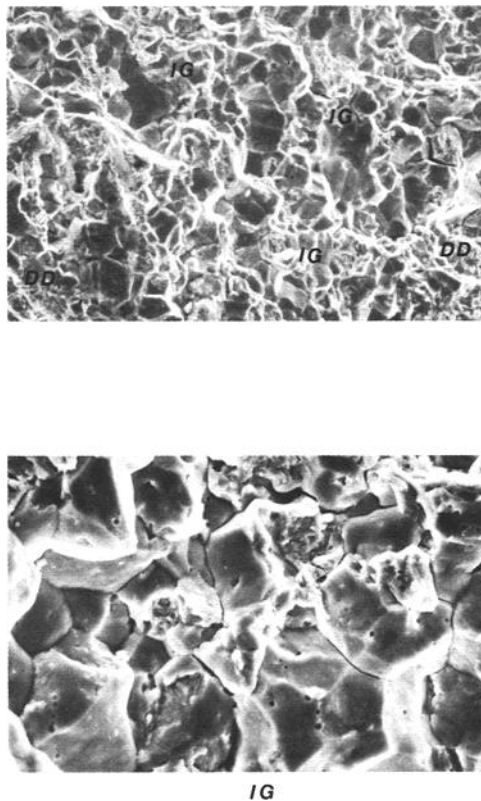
Hydrochloric acid-pickled embossed grenade body (15B41 steel—Manufacturer E) examined by SEM. Upper fractograph shows a large patch of intergranular (IG) fracture surrounded by a dimple ductile (DD) mode (about $\times 300$). Lower fractograph shows the same region of intergranular fracture (about $\times 1000$).
